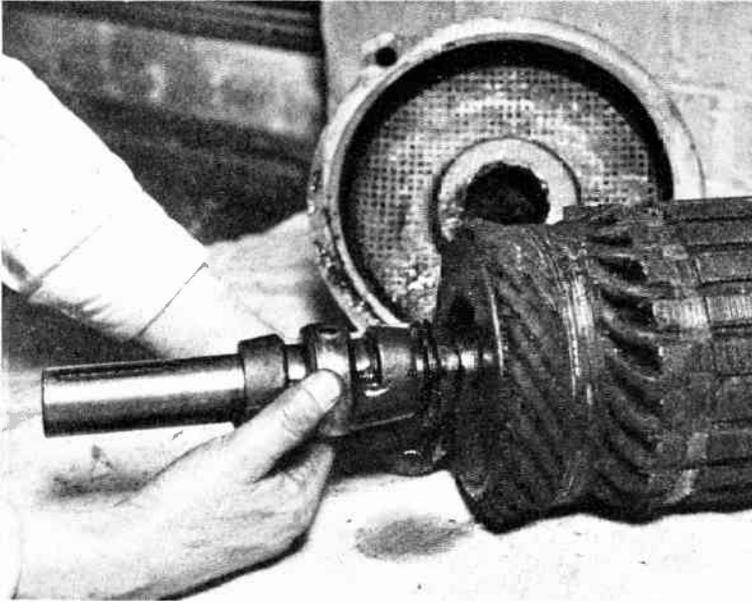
INSPECTION OF A BEARING BUSH FOR WEAR.
